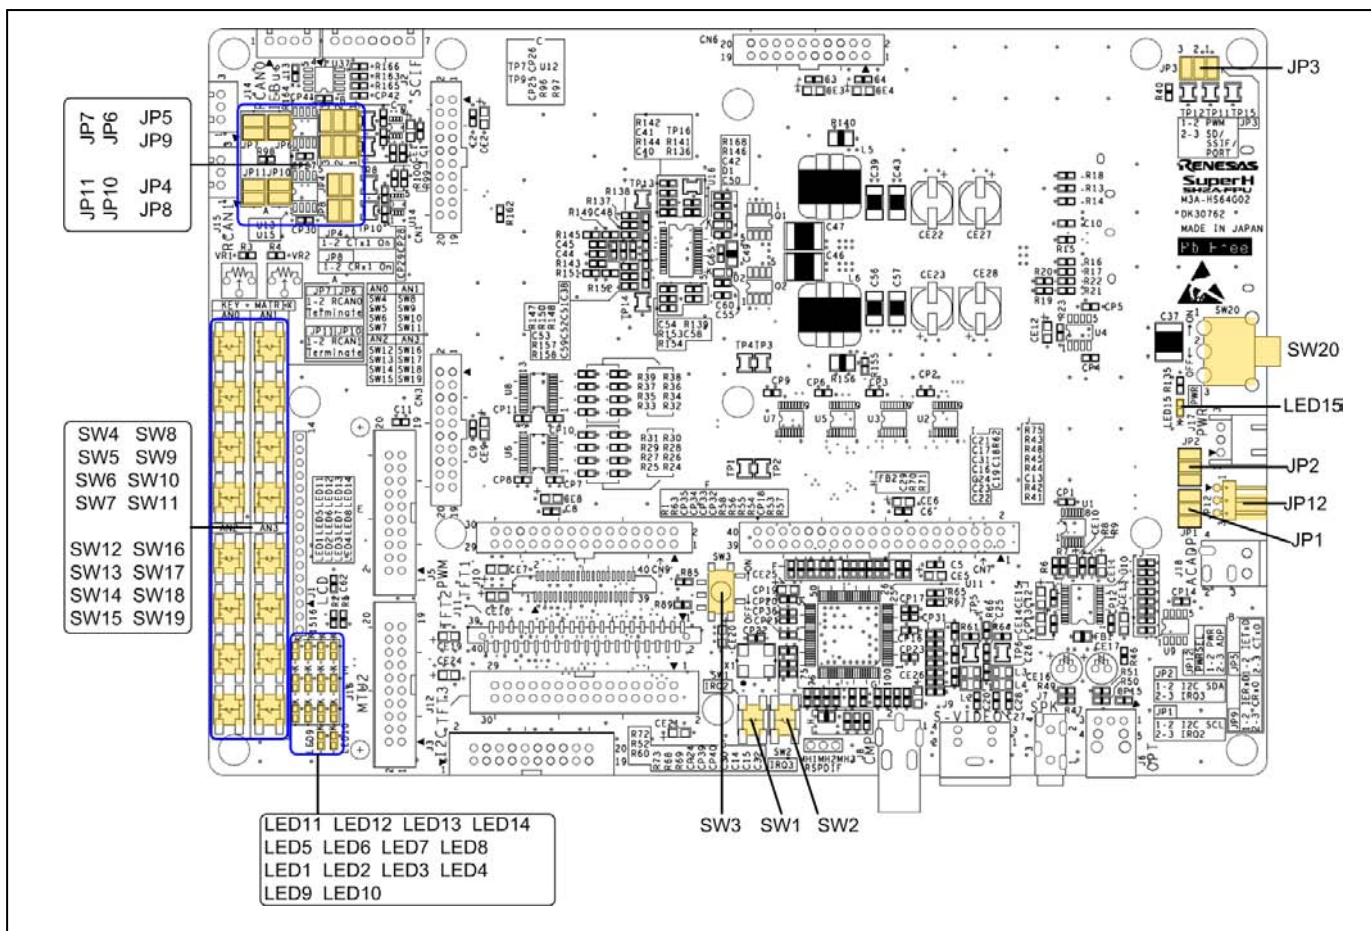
M3A-HS64G02 Operating Components (Top View of the Component Side)
